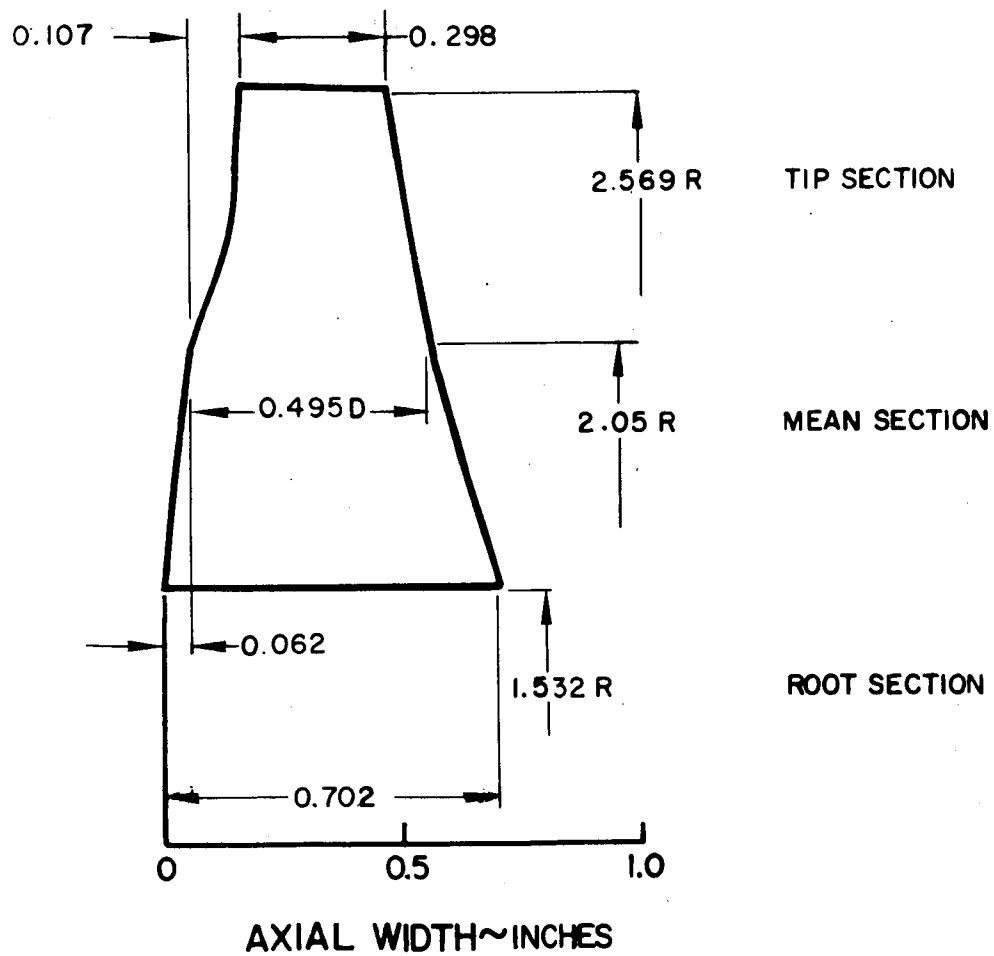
Number 2 Blade Fairing. Blade Elevation (All Dimensions Hot)
